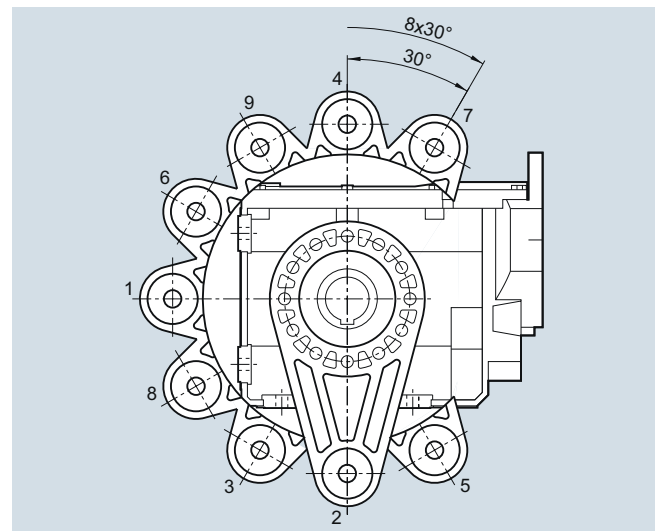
/9 Bevel gearboxes BAD., sizes 39 and 49
